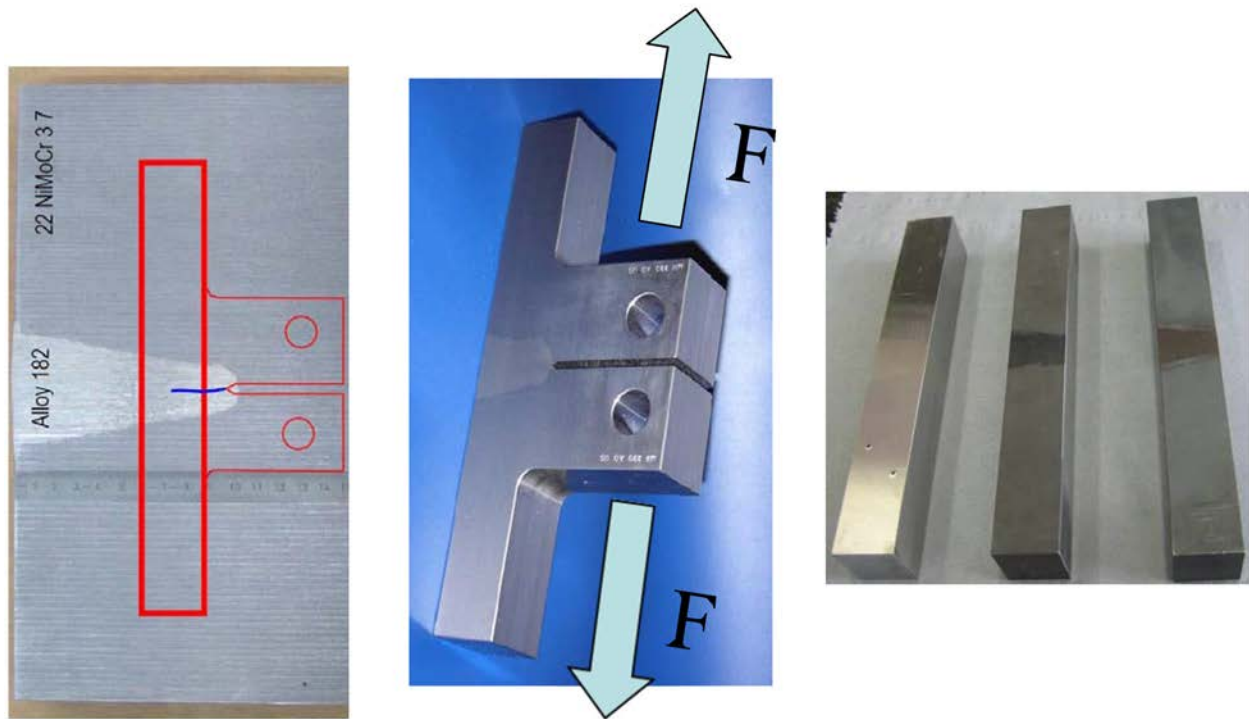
Photograph and Depiction of FB Test Block Cut Out into Standard Fracture Mechanics Specimen from Reactor Pressure Vessel Material
